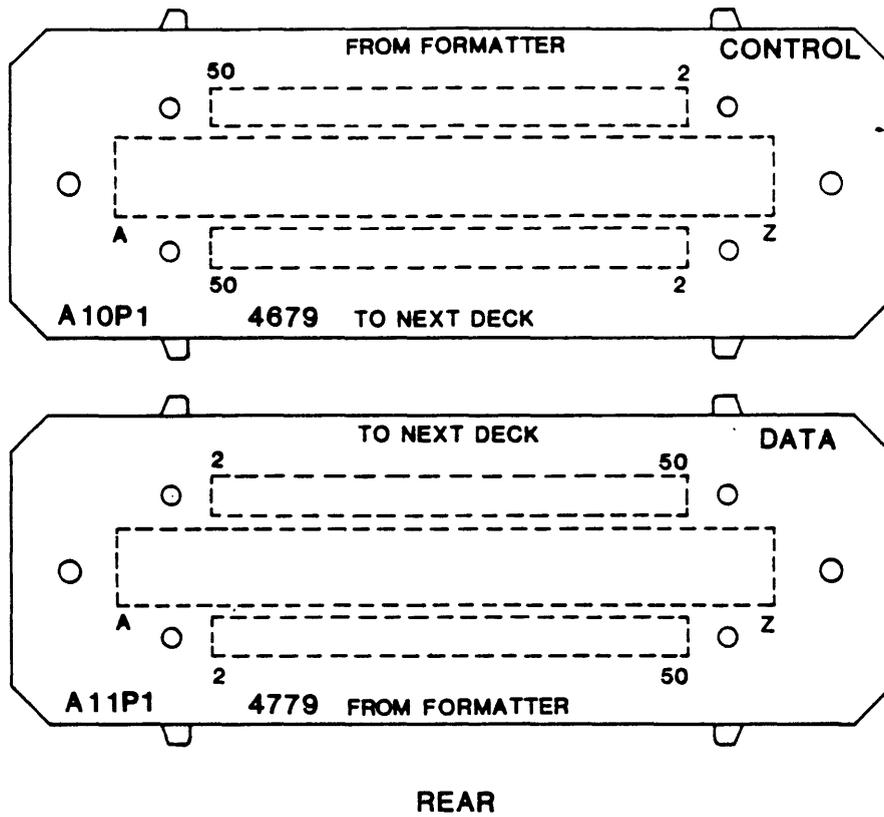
Cable Adapter Assembly (Kit) P/N 90-04900-1KK
